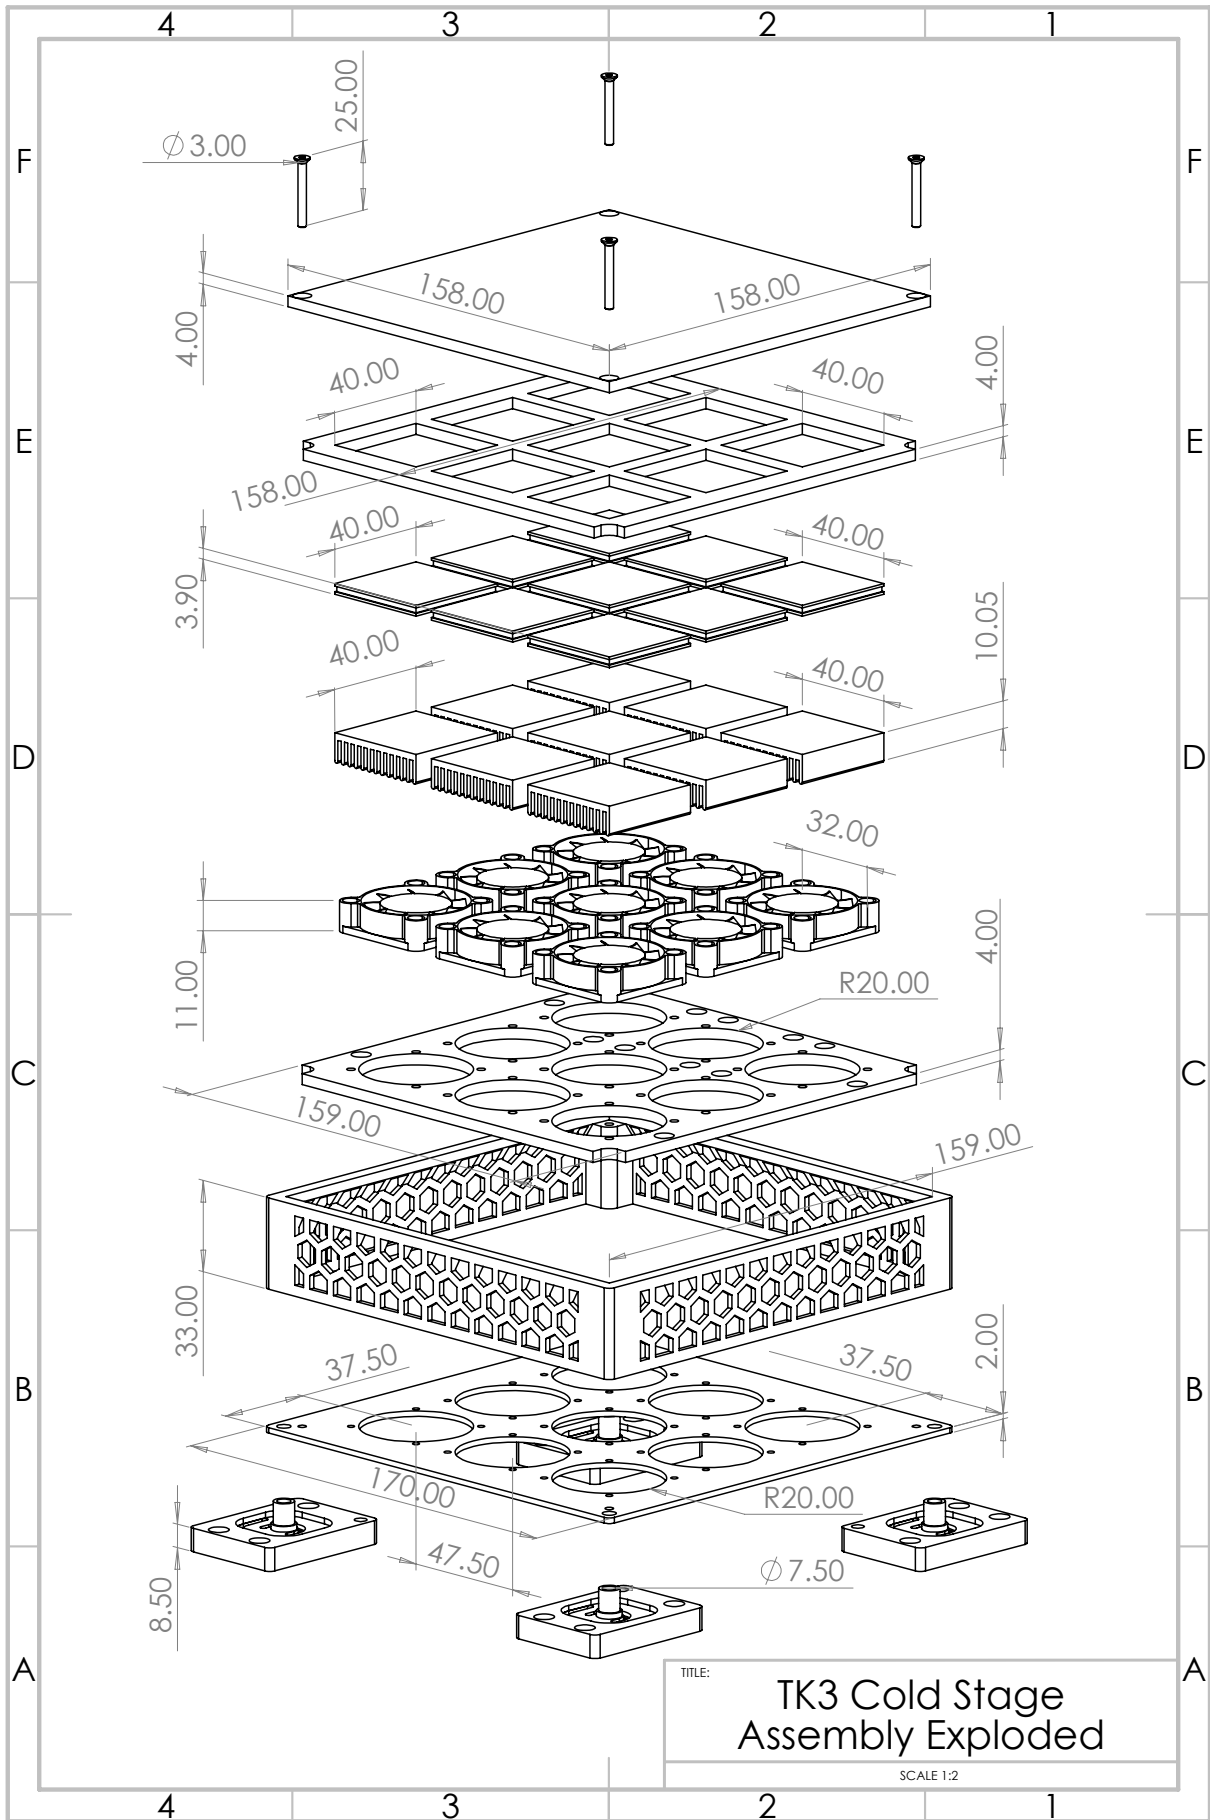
Technical Drawing of Cold Stage Assembly Exploded View
